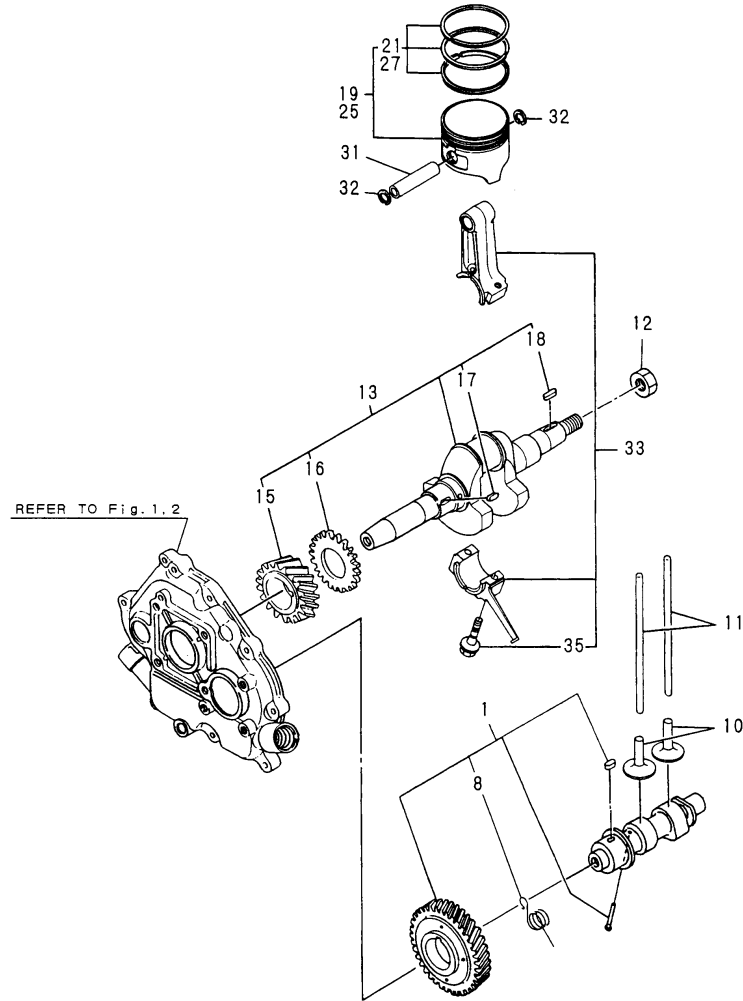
CRANKSHAFT,PISTON & CAMSHAFT
